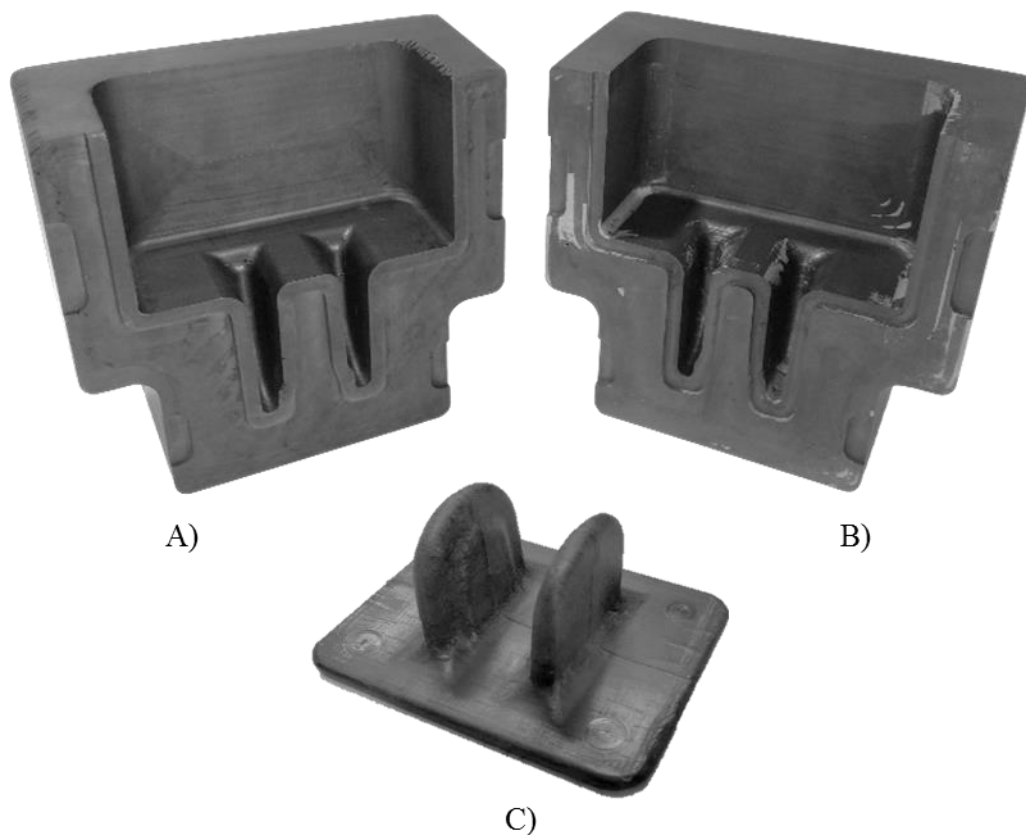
A,B) Compression molding tool printed with 50% by weight of carbon fiber reinforced PPS for manufacturing of pin bracket. C) Pin bracket manufactured by compression molding of chopped carbon fiber prepreg (IM7-8552) in a printed compression molding tool.
